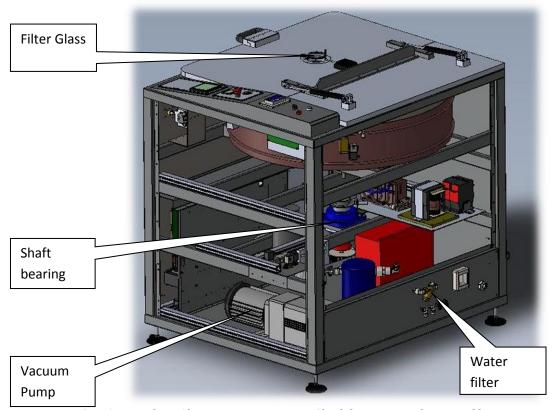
Filter Glass, Vacuum Pump, Shaft bearing and Water filter position
